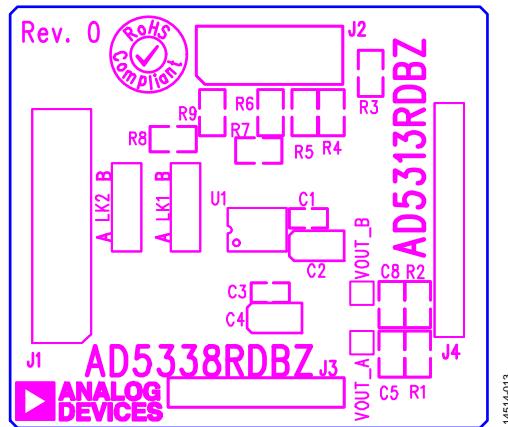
EVAL-AD5338RDBZ Daughter Board Component Placement
